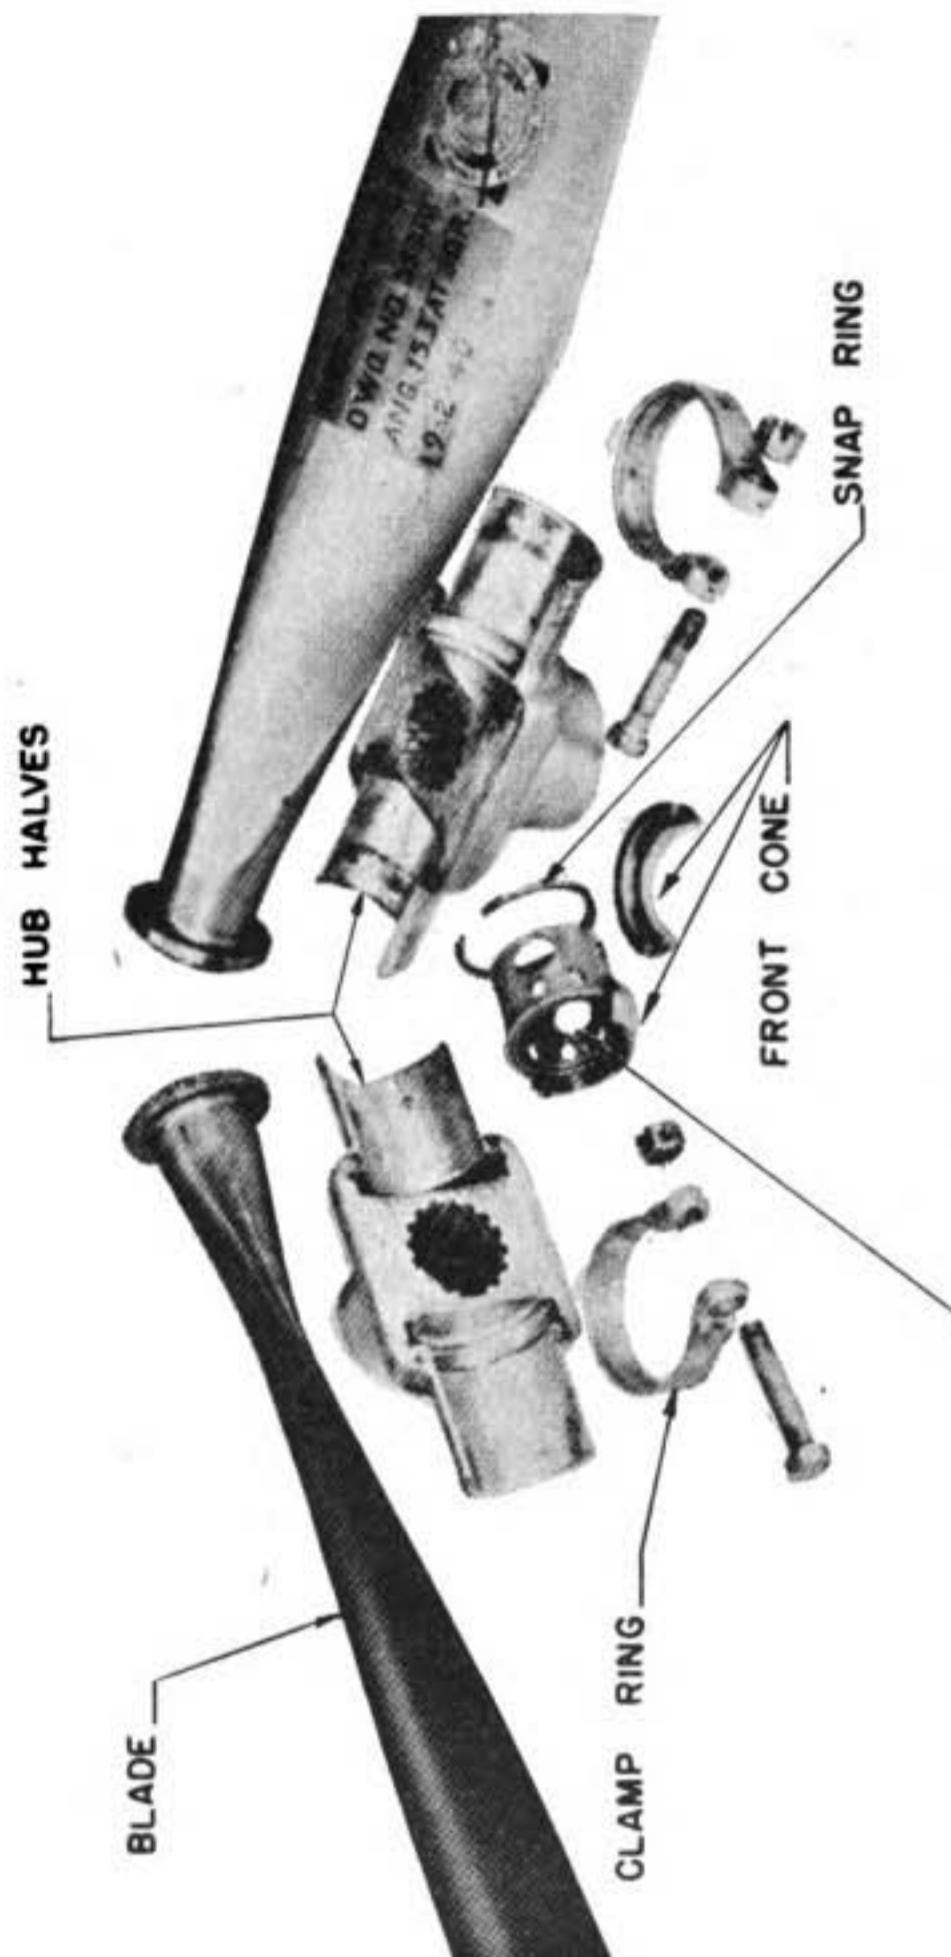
Steel-blade ground-adjustable propeller assembly.
